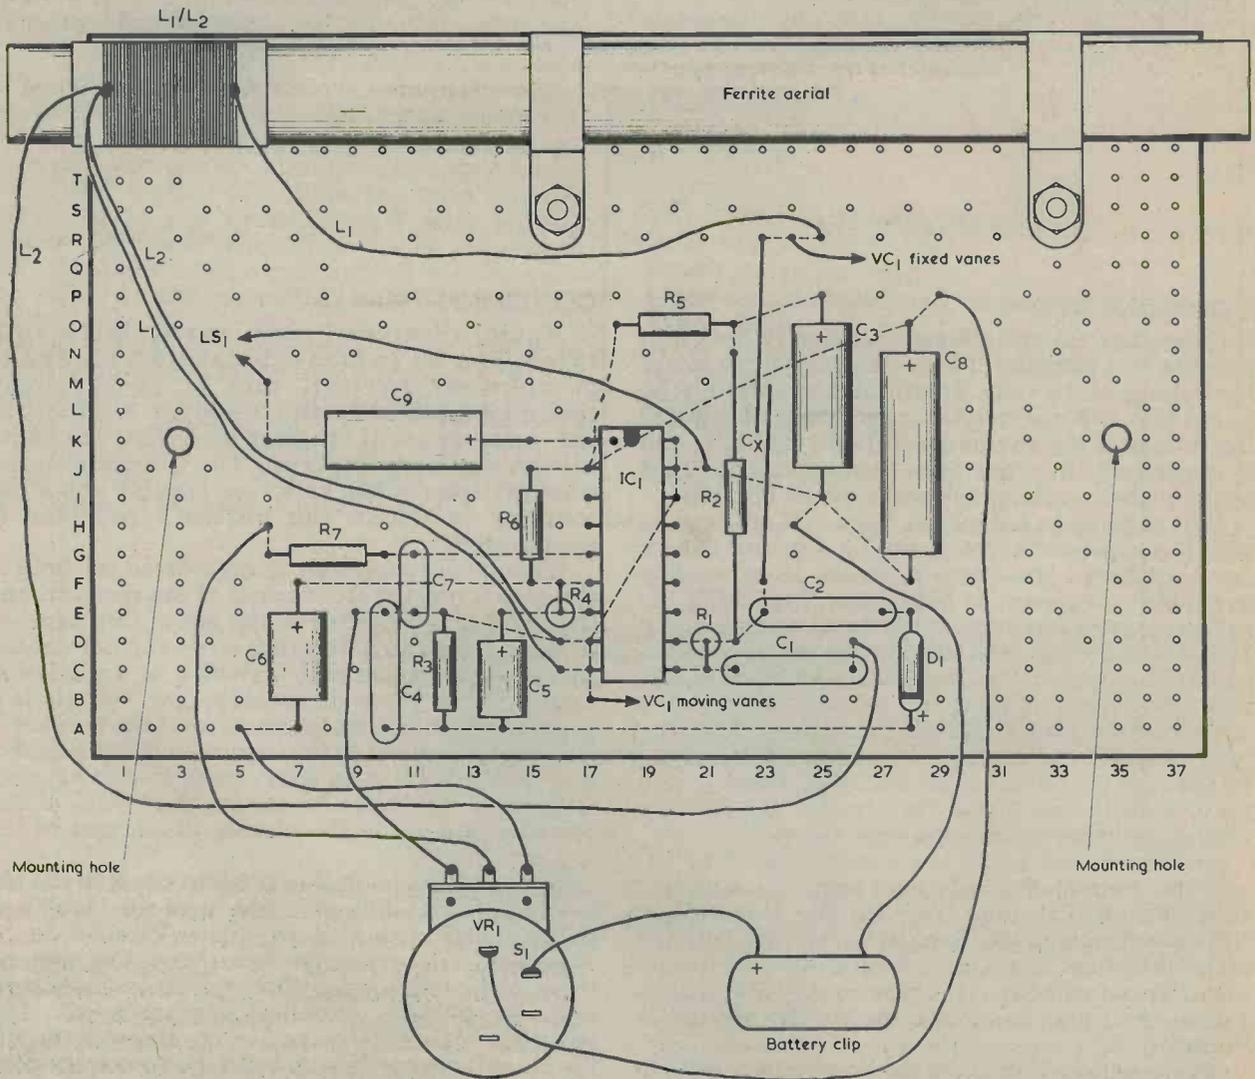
Apart from the battery and the components on the front panel of the case, all the parts are assembled on a perforated s.r.b.p. board of 0.1 in. matrix. Interconnections below the board are shown in broken line.
